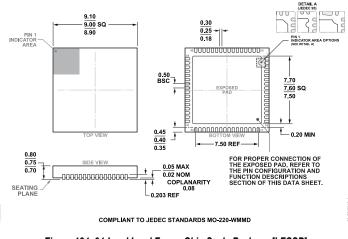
64-Lead Lead Frame Chip Scale Package [LFCSP] 9 mm × 9 mm Body and 0.75 mm Package Height (CP-64-15) Dimensions shown in millimeters
